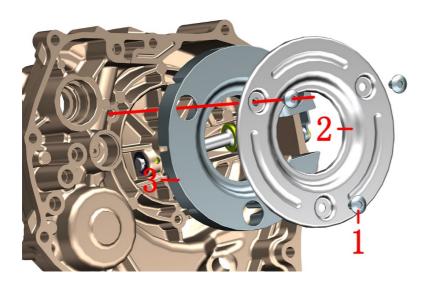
RIG	GHT CRANKCASE	Remove the noise reduction component of the right	CHK	Q
